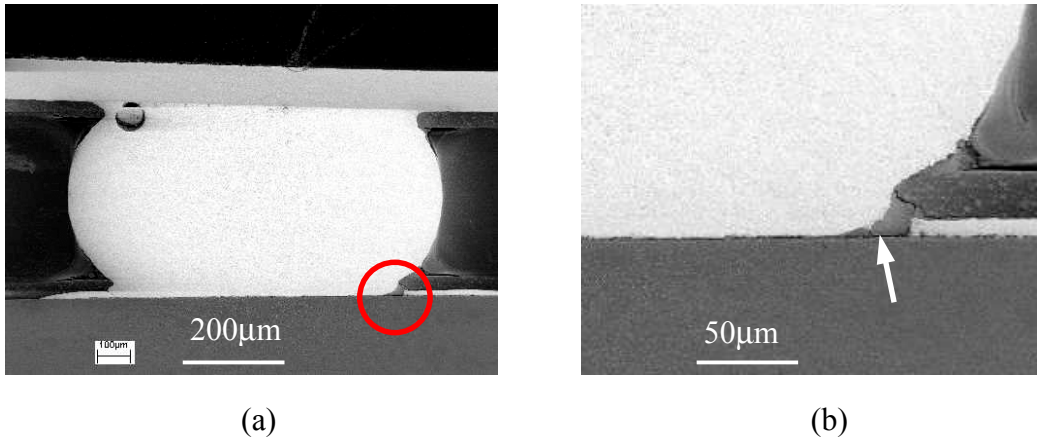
(a) A typical CCB solder joint that was found open at 135 cycles; and (b) the zoomed-in view of the circled region.
